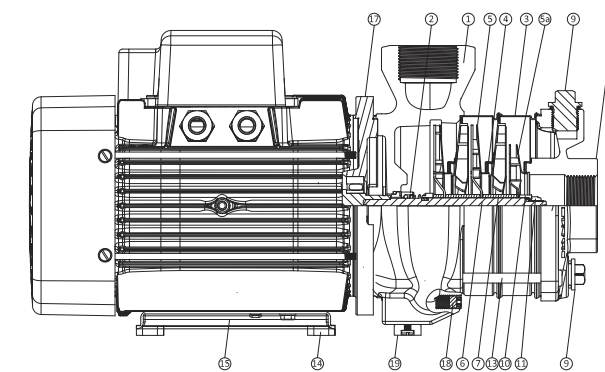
SH, SHI & SHN 12 with SMG 90 motor
